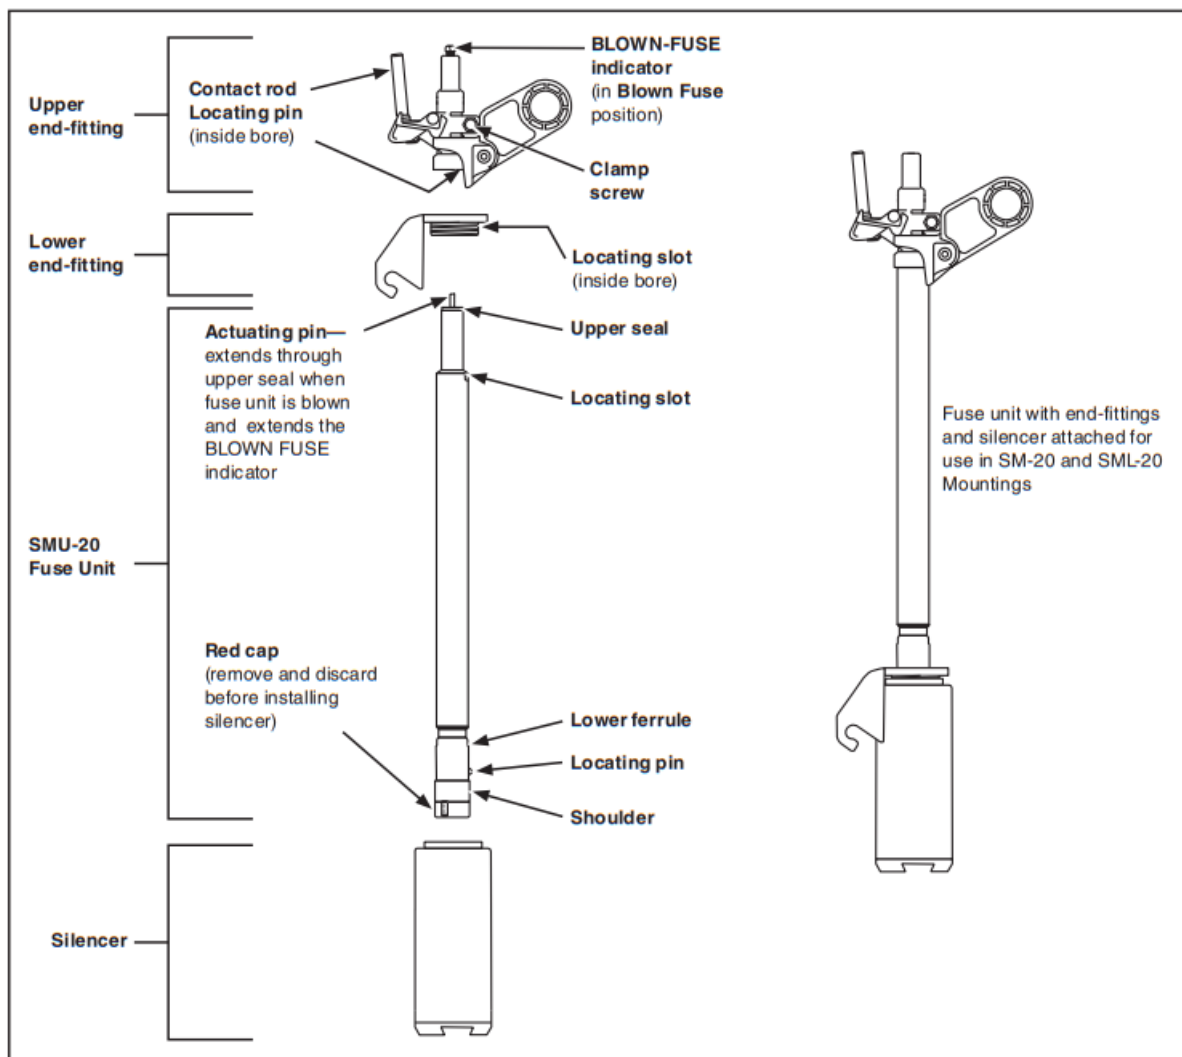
(a). SMU-20 Fuse Unit with end-fittings and silencer for use in indoor SM-20 and SML-20 mountings.
